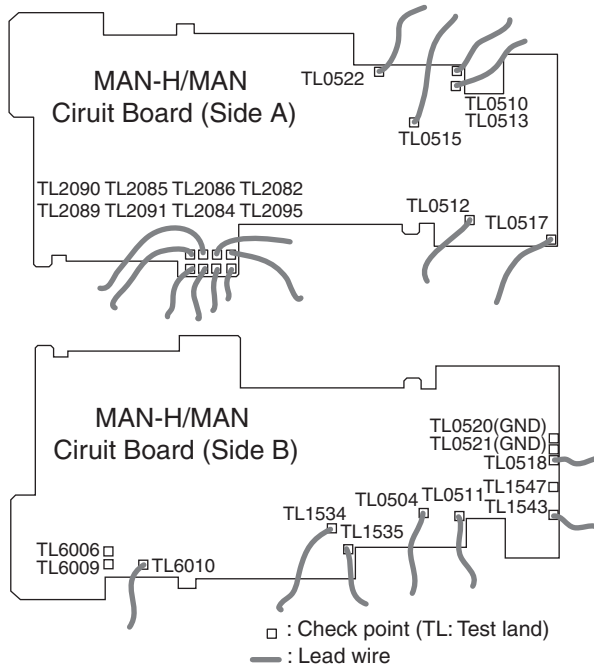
Lead wire soldering of MAN-H/MAN circuit board
